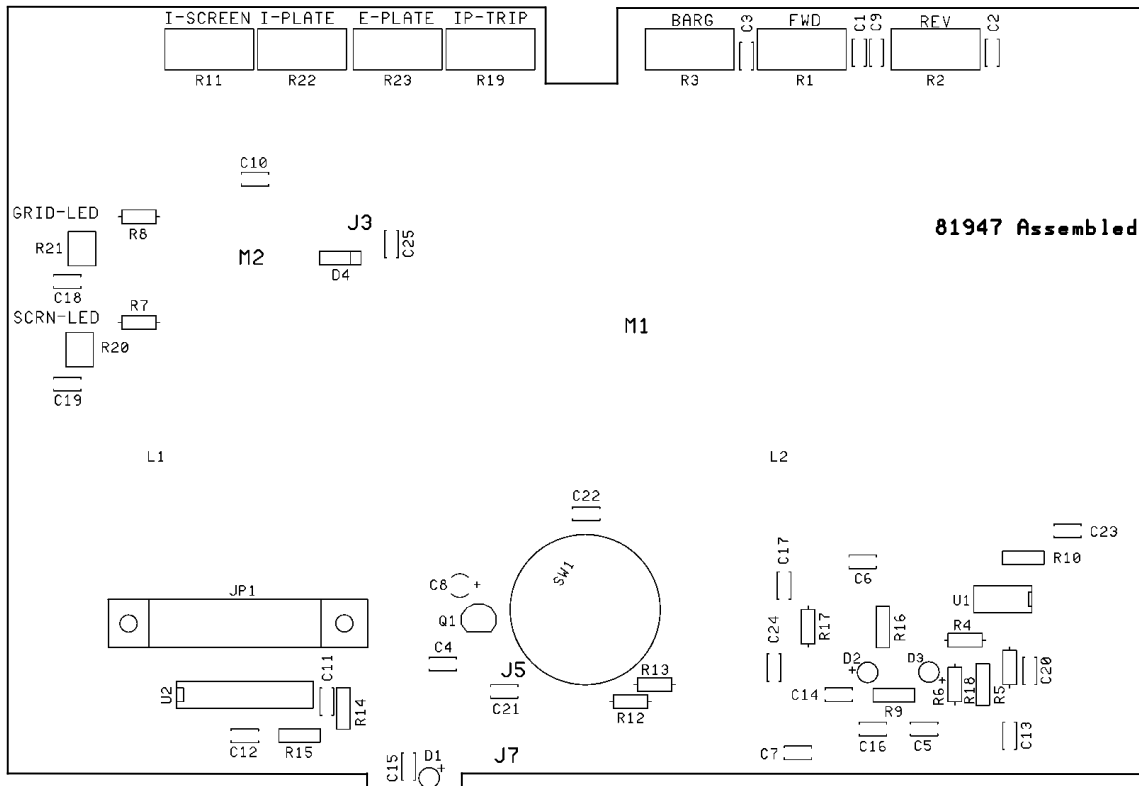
PLATE CONNECTOR BOARD (ASSEMBLY A3)
